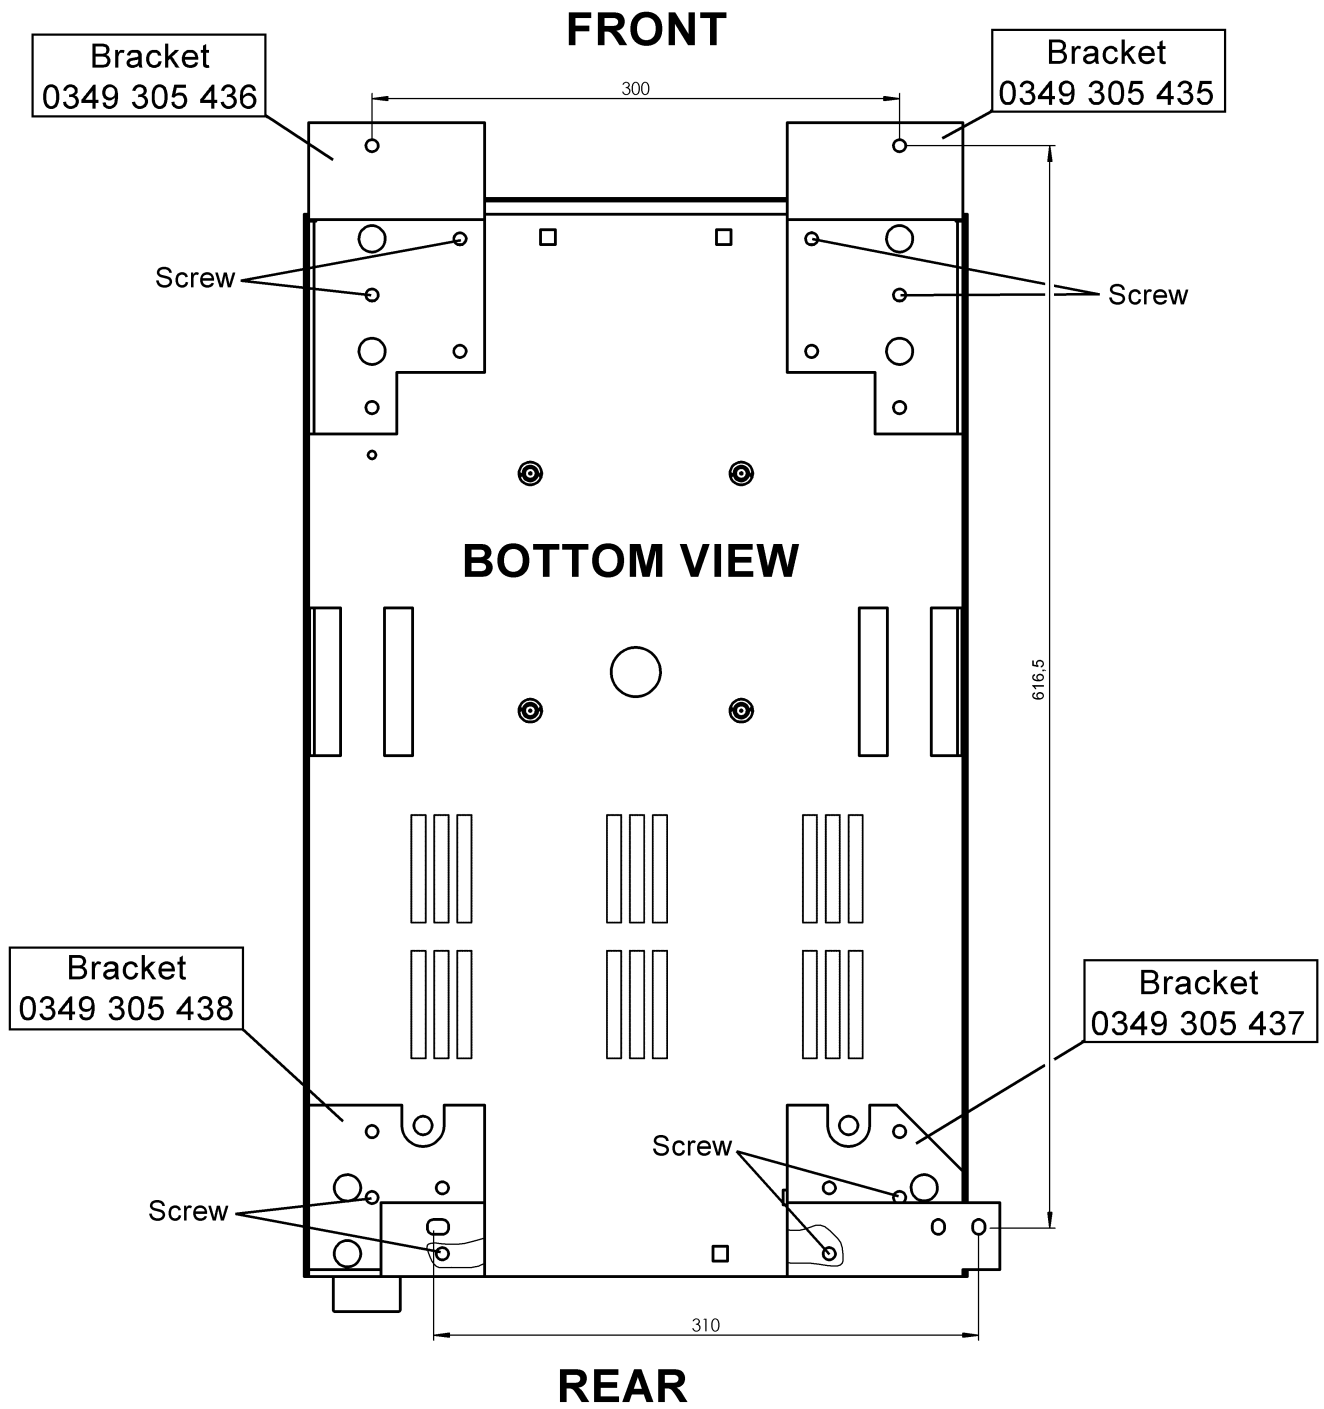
Mounting brackets fastening on Origo™ Mig 400t, 500t.
